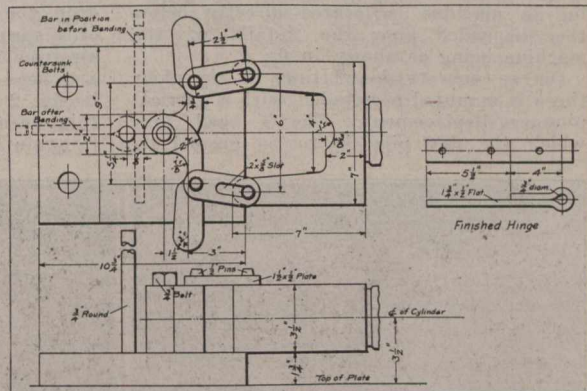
Hinge Forming Blocks for Dump Car Aprons.
